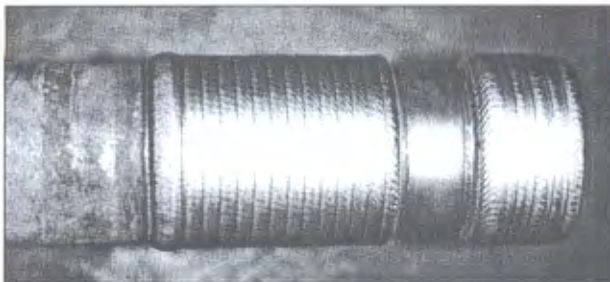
Oil drilling piston hardfaced with Stellite 712 by PTA
